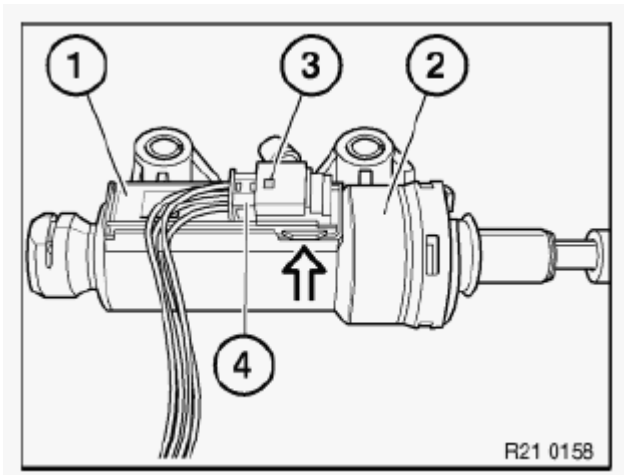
Identifying Clutch Master Cylinder And Clutch Switch Module
